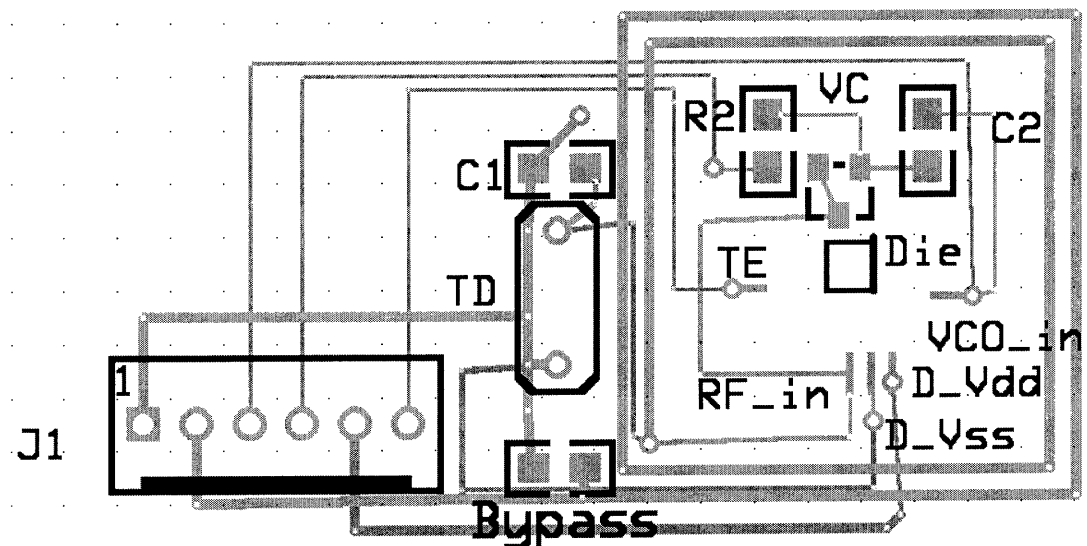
Layout of the transmitter PCB (Red: component side; Green: solder side).
